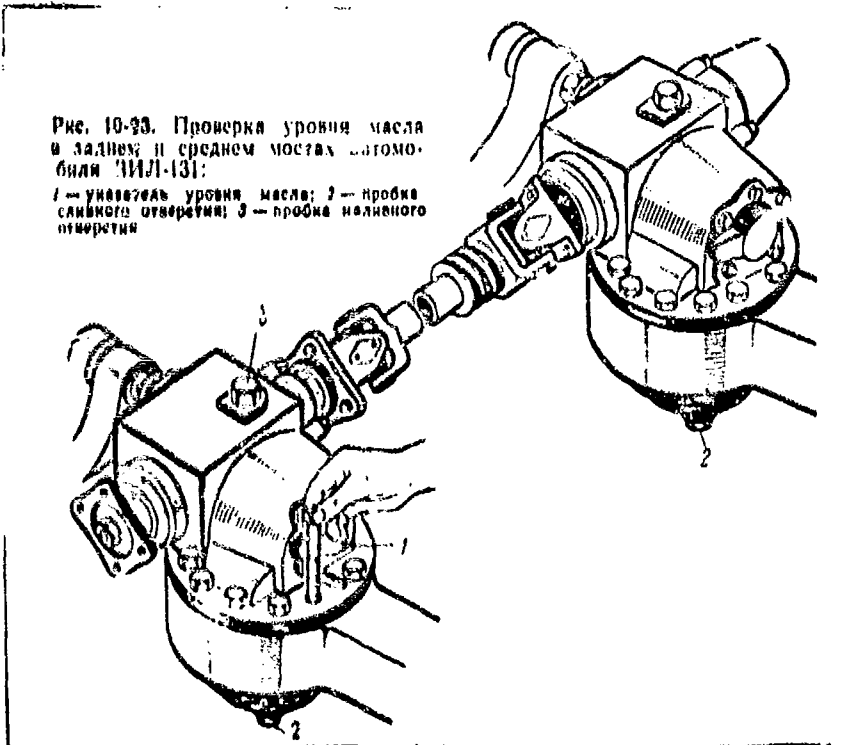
Checking the oil level in the middle and rear drive axles of a ZIL-131 motor vehicle:
